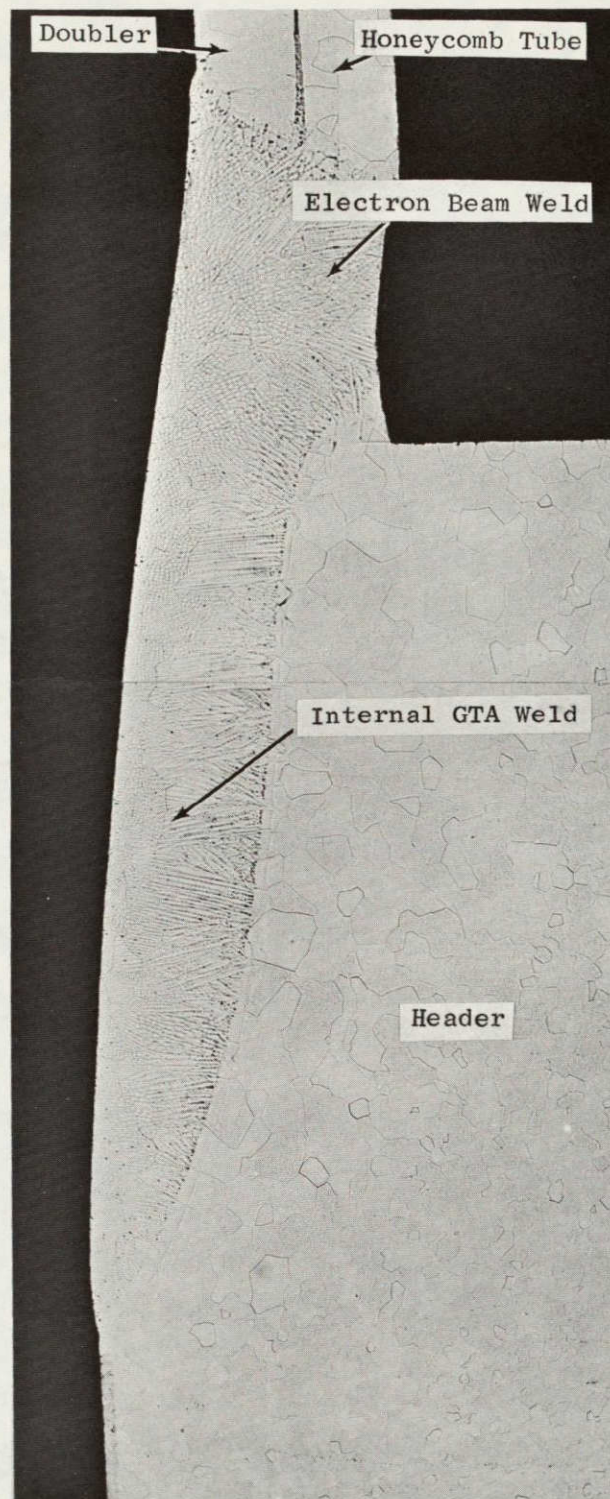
Typical Microstructure of Tube-to-Header GTA Weld Joint No. 12.
